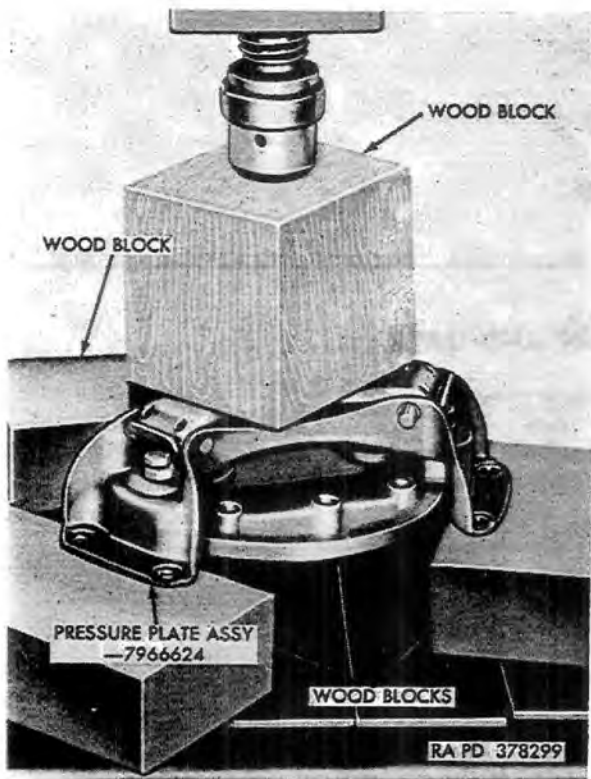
Clutch pressure plate blocked in press for disassembly or assembly.
